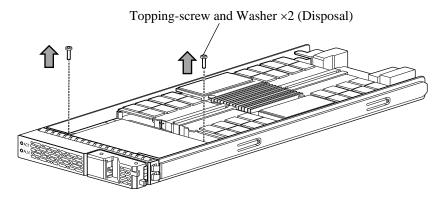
D Removing Tapping-screws and Washers
